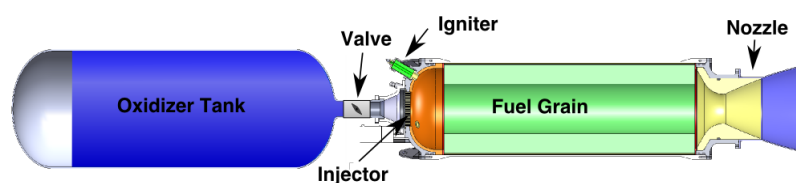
Cross-section view of a typical hybrid rocket motor [105].
